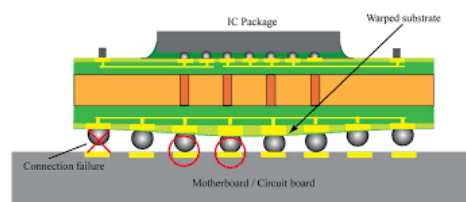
Warpage between package and PCB - solder disbond is highlighted
